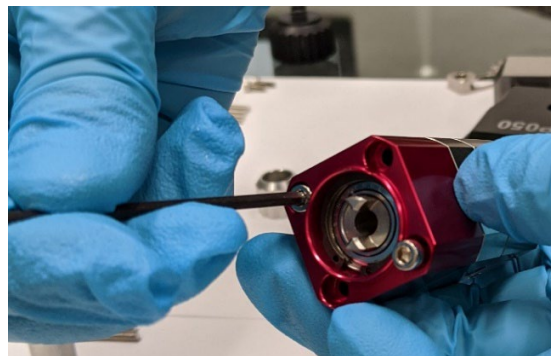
Install Screws onto Rotor Assembly/Fluid Block
